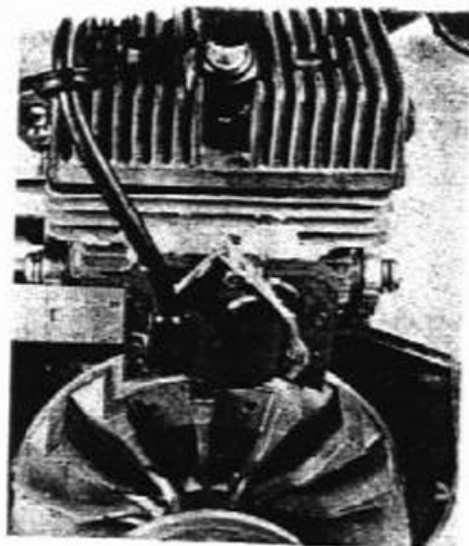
Ignition assembly showing proper position of the stator plate. Also, proper position of flywheel when points open. Note coil "T-job" and epoxy to reinforce stock stator plate.
